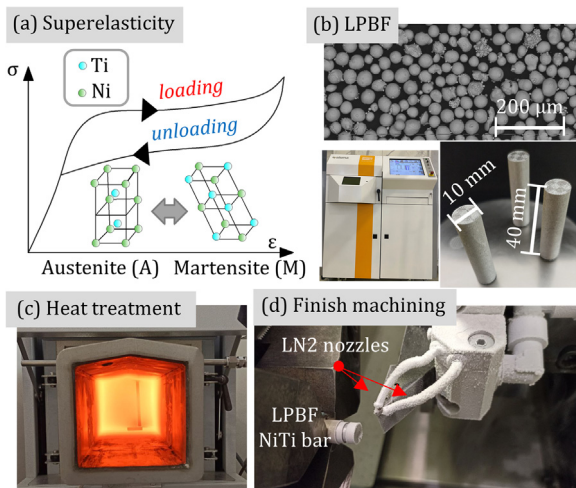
NiTi SE (a); LPBF (b); heat treatment (c); finish machining (d).
